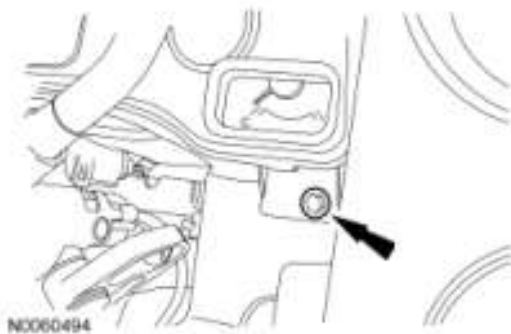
Locating Transmission Insulator And Retainer Crossmember Nuts
